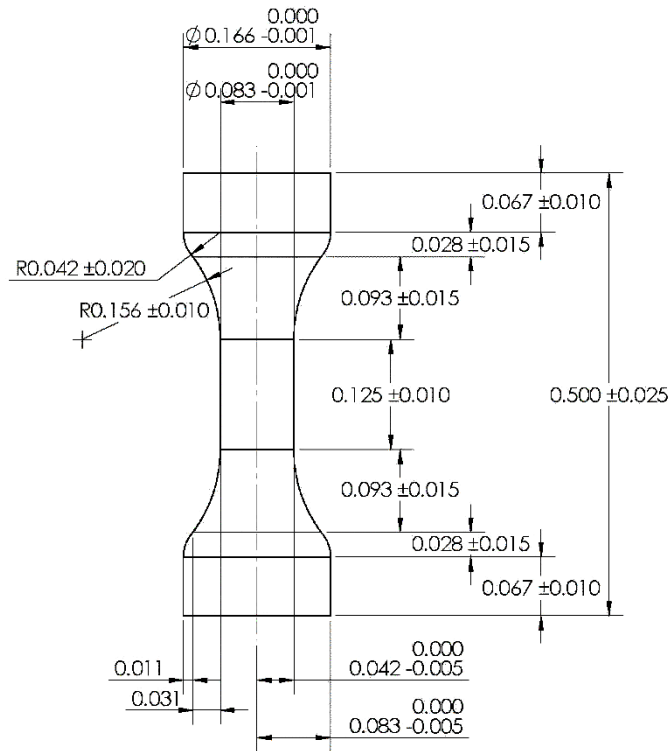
The dumbbell-shaped specimen tested in this exercise. All dimensions are in inches.
